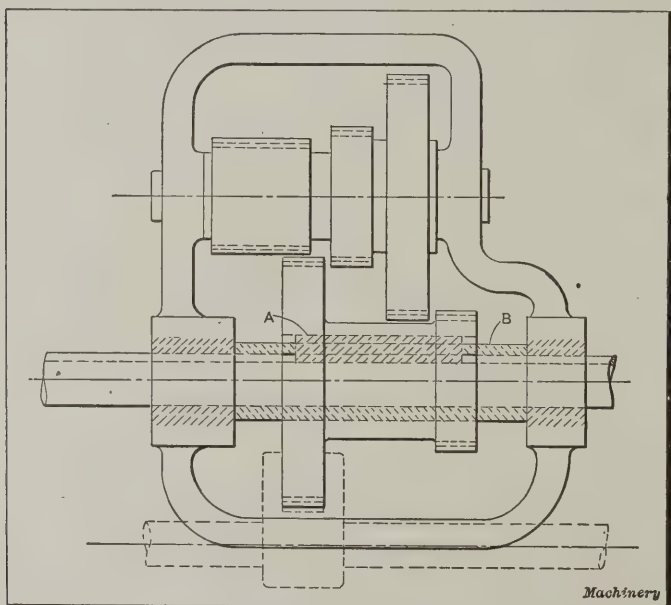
Method of Overcoming the Tendency of the Gears in the Gear-box to disengage
